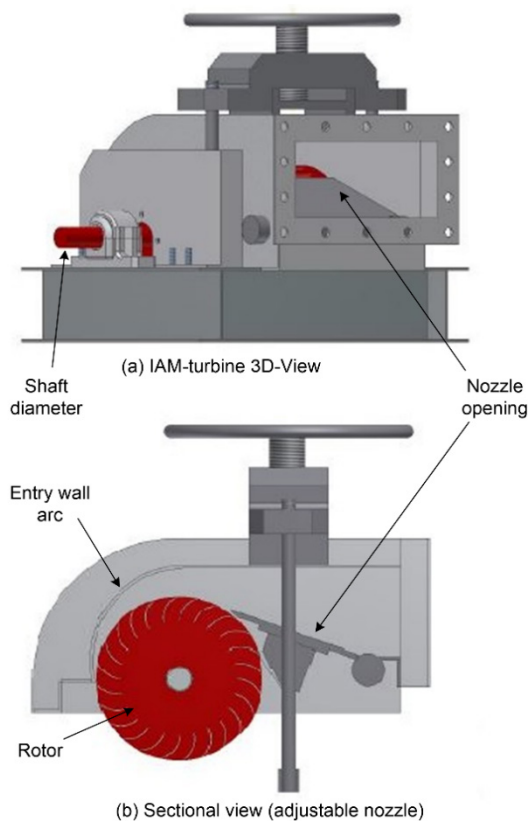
IAM turbine assembly drawing adopted from [4]; a) 3D isometric view, and b) sectional view with the adjusting part
